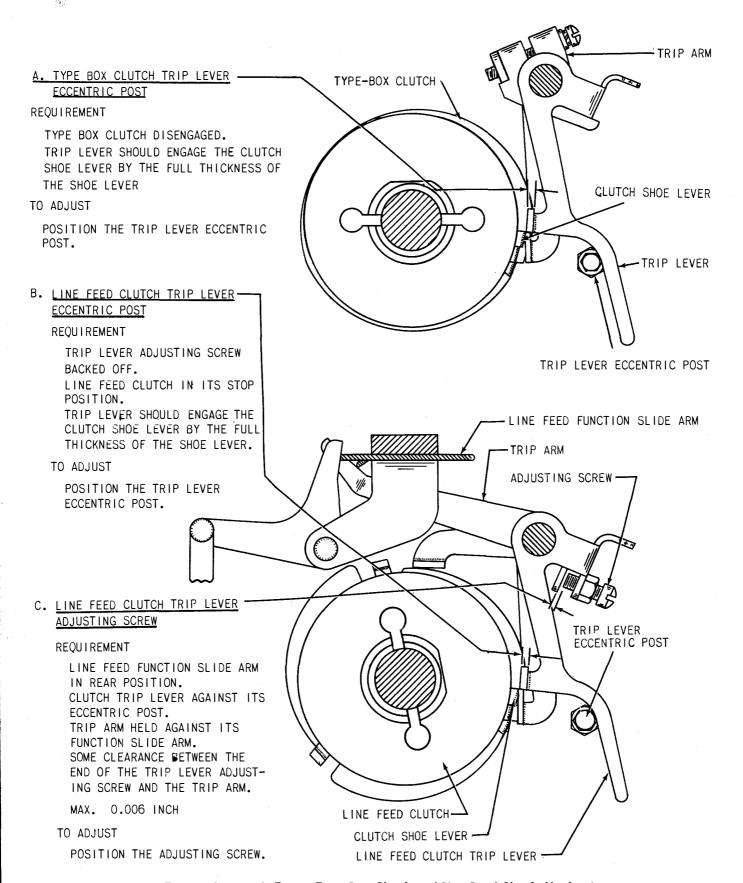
Automatic Typer, Type Box Clutch and Line Feed Clutch Mechanism
